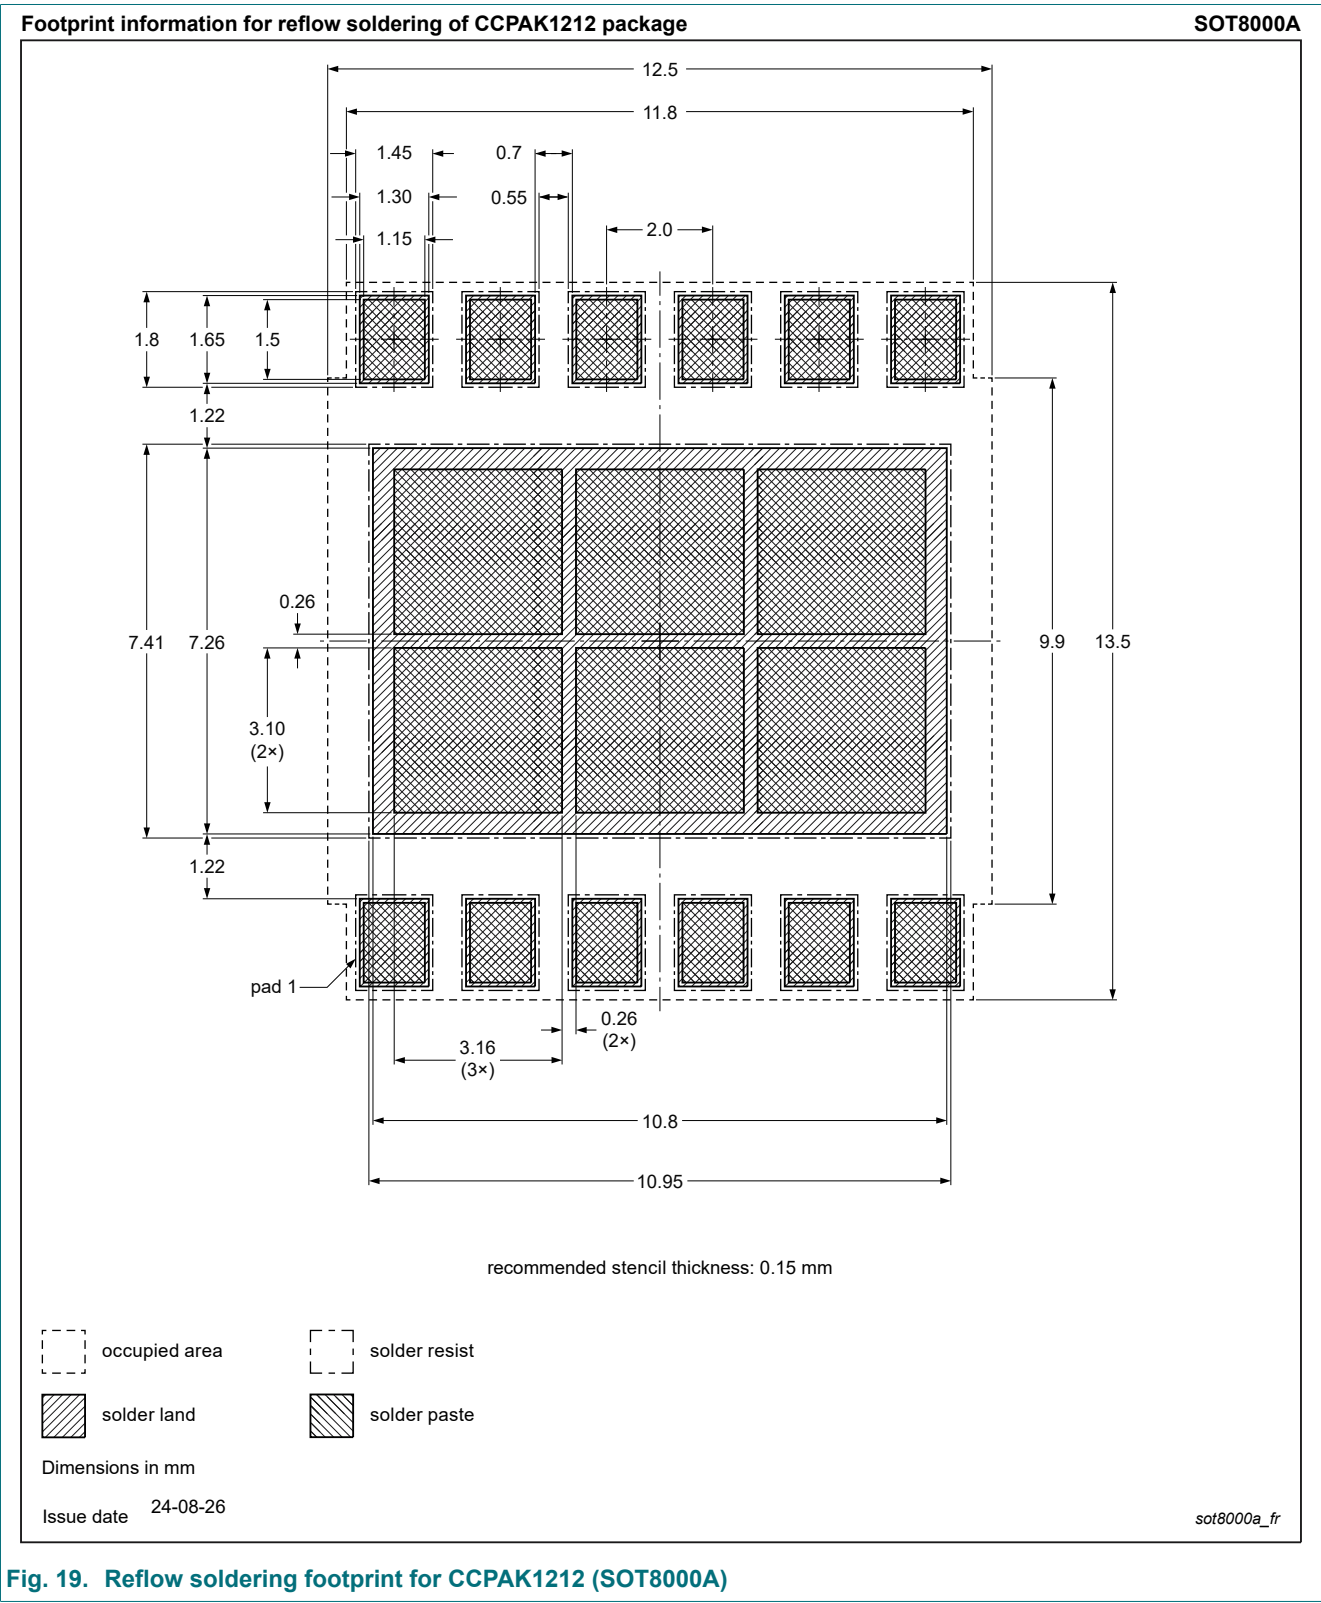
Reflow soldering footprint for CCPAK1212 (SOT8000A)
